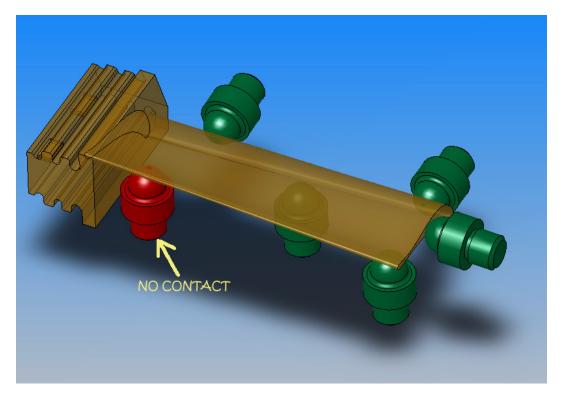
Simplified fixture-workpiece illustration of non-contact of locator with the workpiece during fixturing
